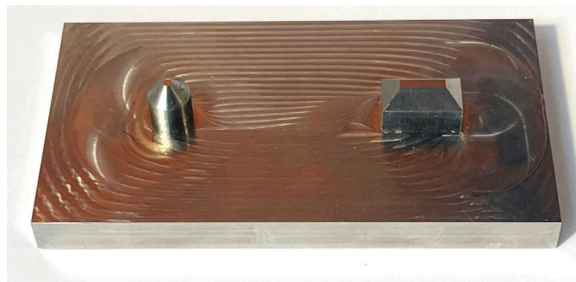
Machined functional gauge used for position of hole and slot inspection method.
